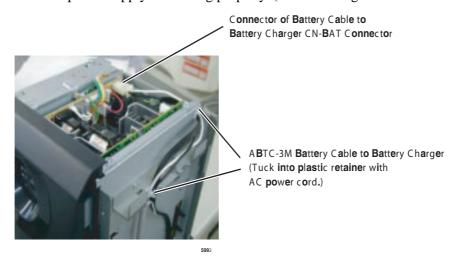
Cable Wiring for the Base and Expansion Cabinets (Top view)
